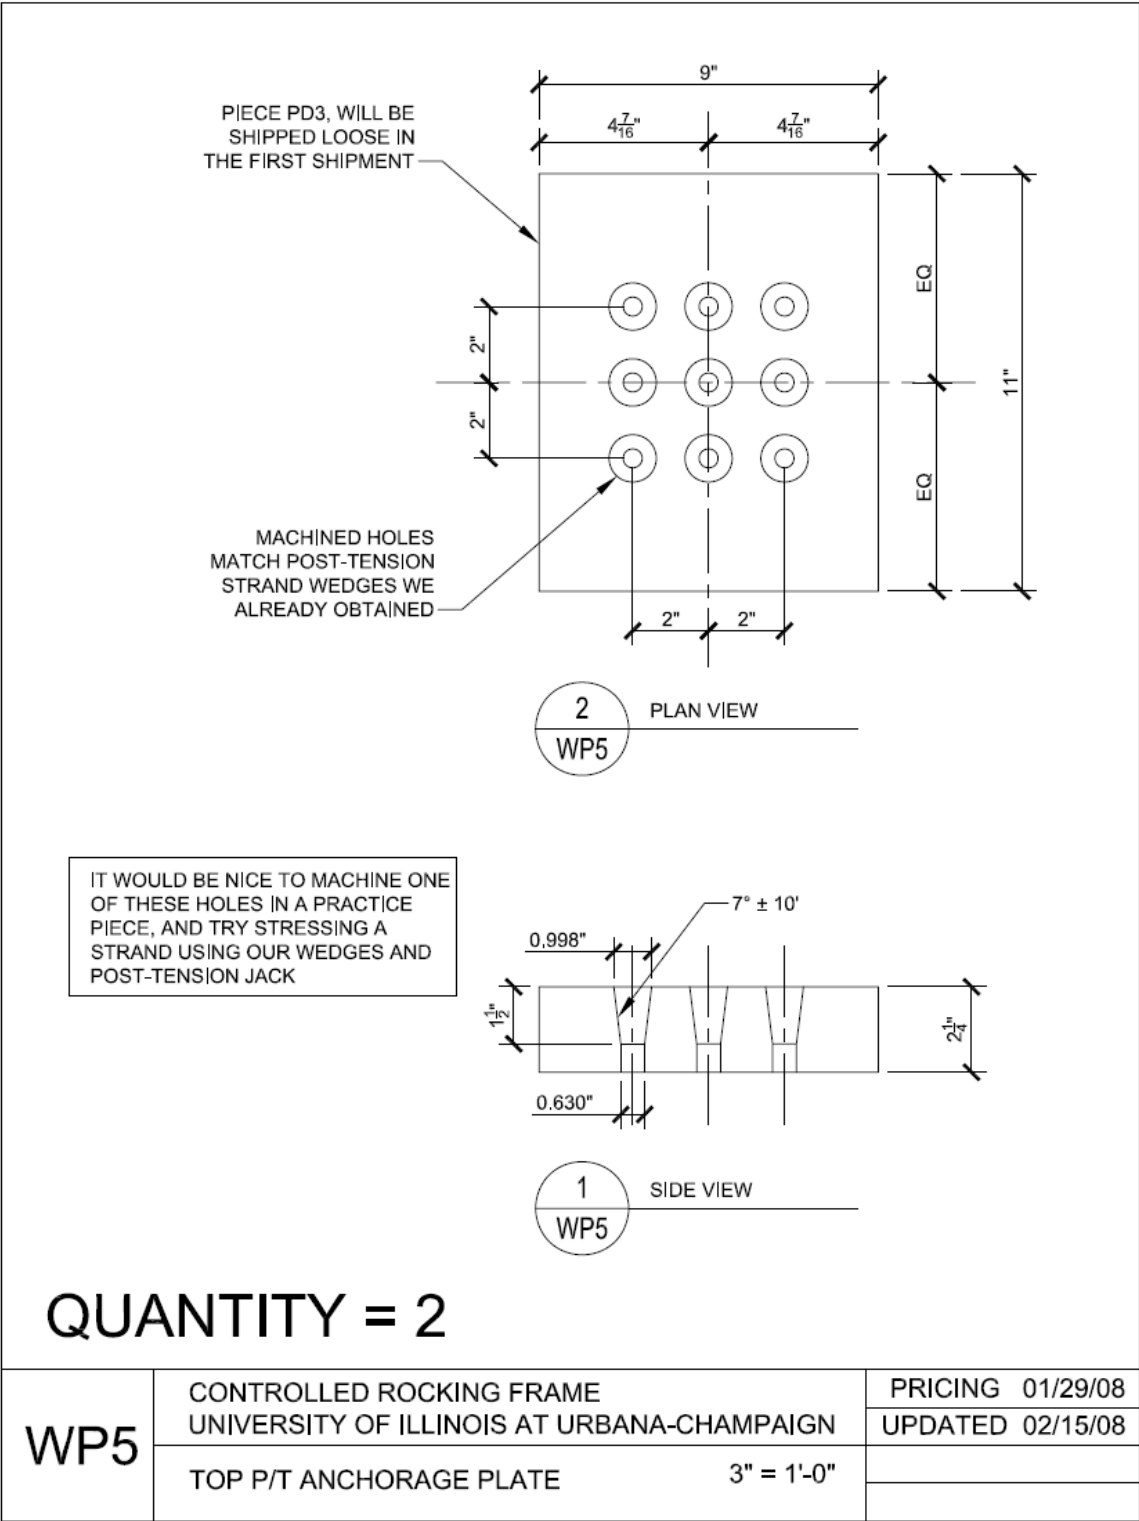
Work Plan Drawing – Top Post-Tensioning Anchorage Plate
